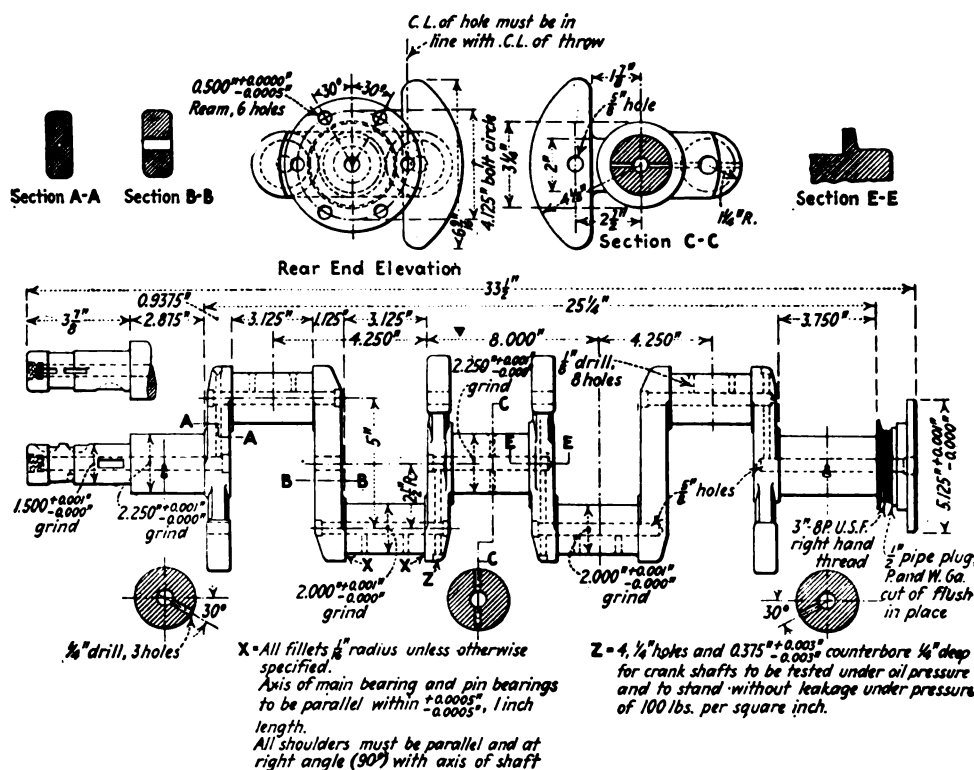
DETAILS OF PEERLESS CRANKSHAFT
